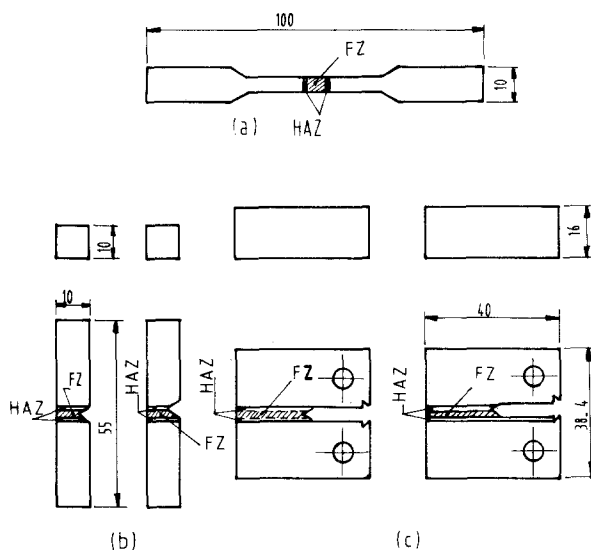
Location of the weld in the tensile, impact and fracture toughness testing samples.
